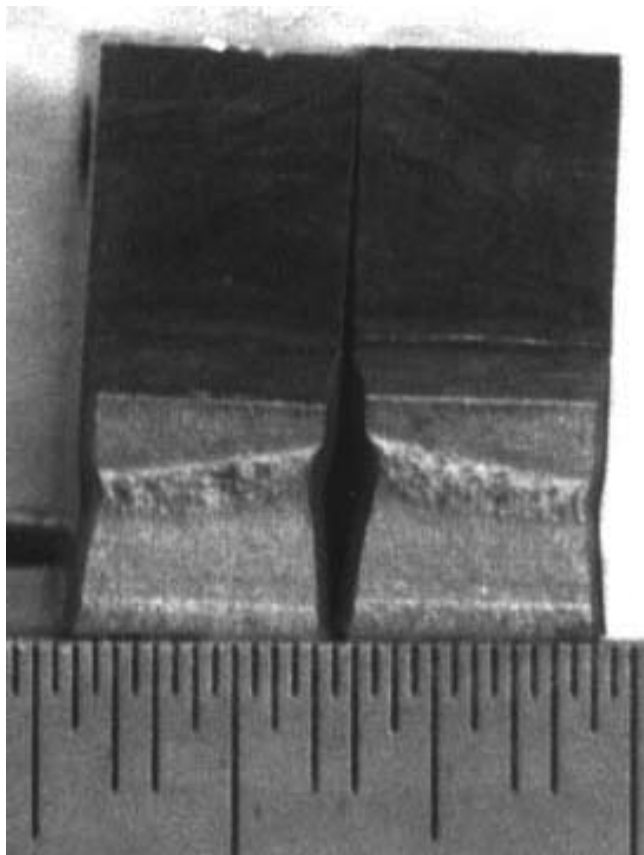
Fracture surface of specimen C19-A tested at 288°C
